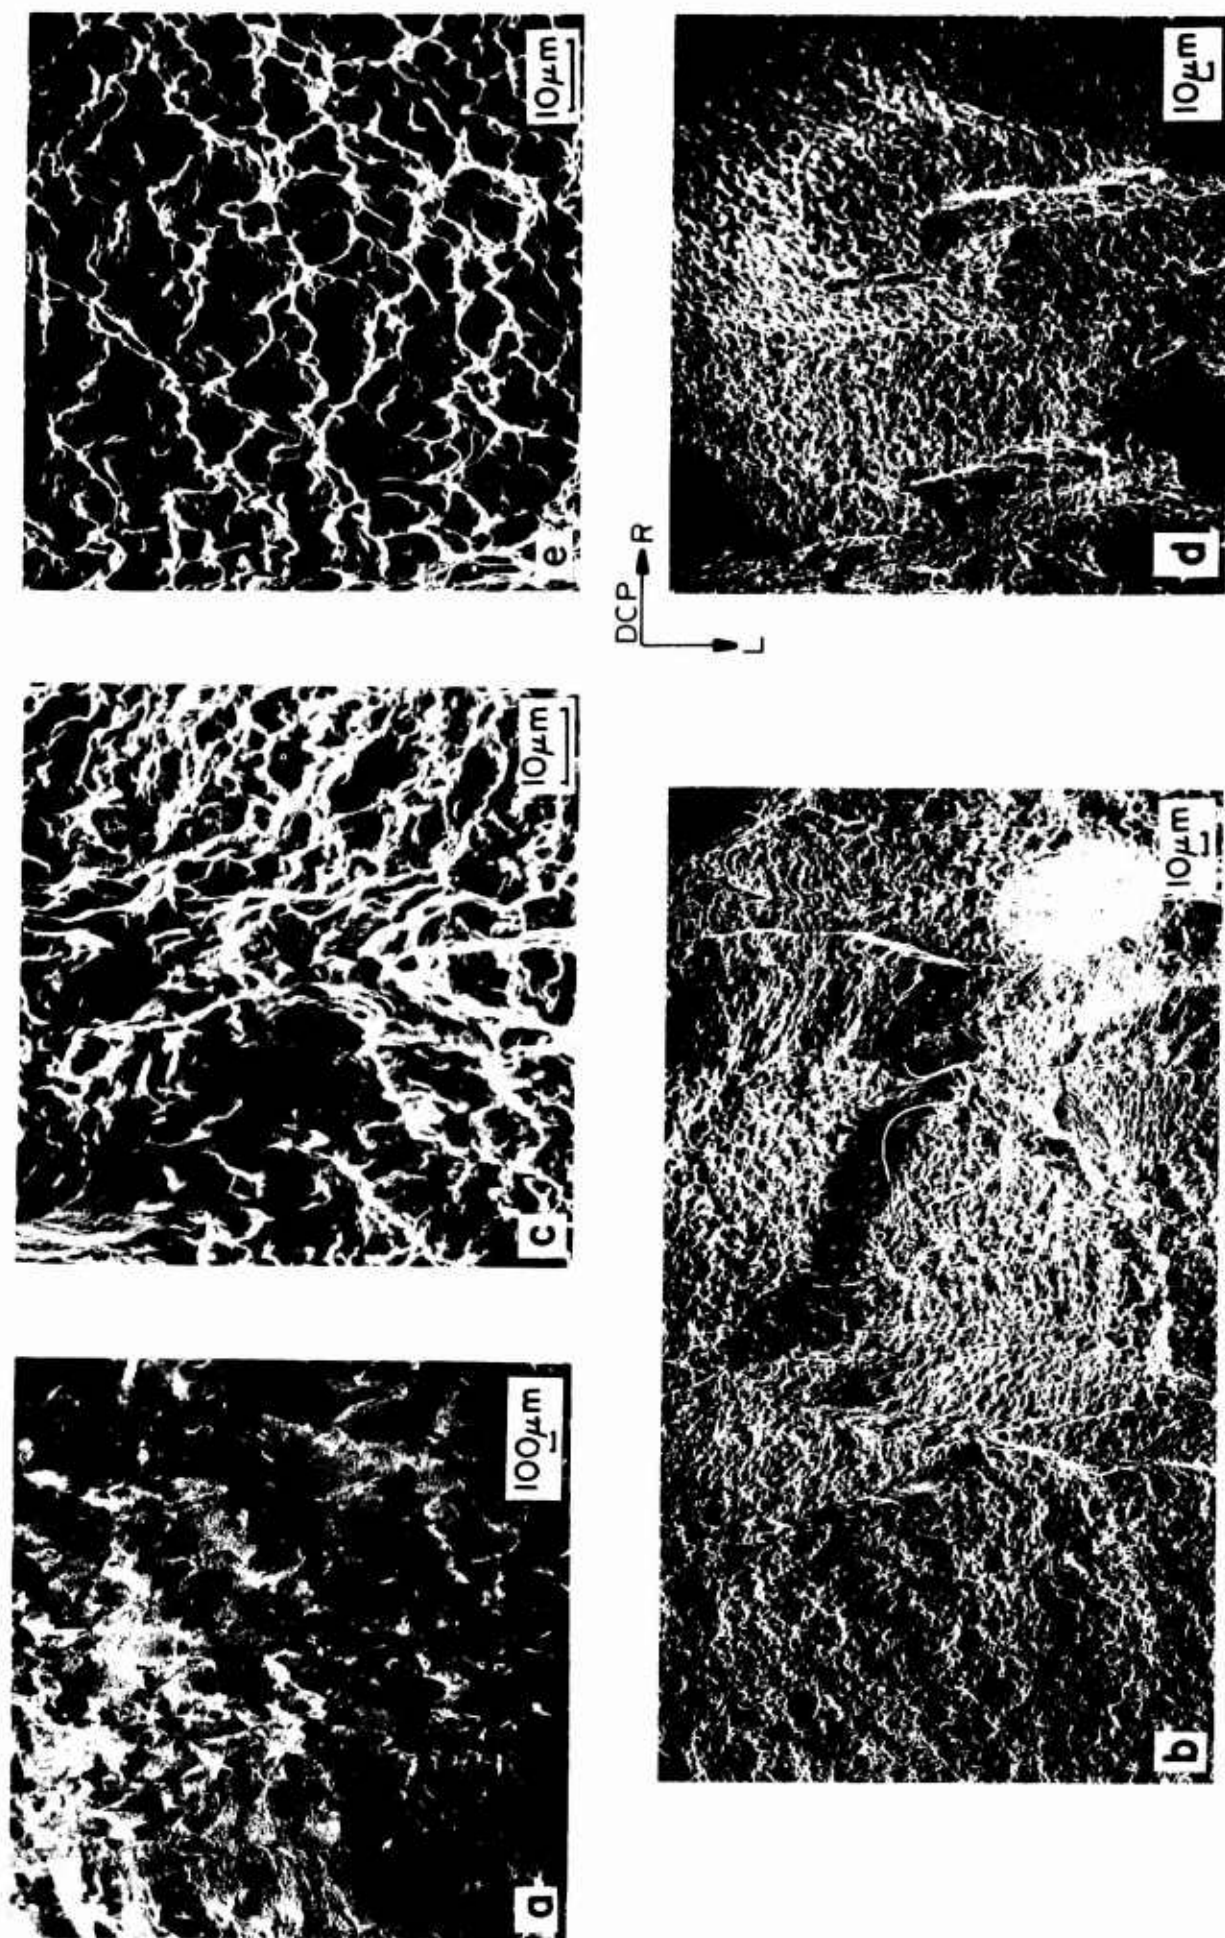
Alloy 334, sample 4SR16. SEM of fracture surface (a) X250, (b) X250 - precrack/fast fracture transition, (c) X250, (d) X500 - fast fracture.
